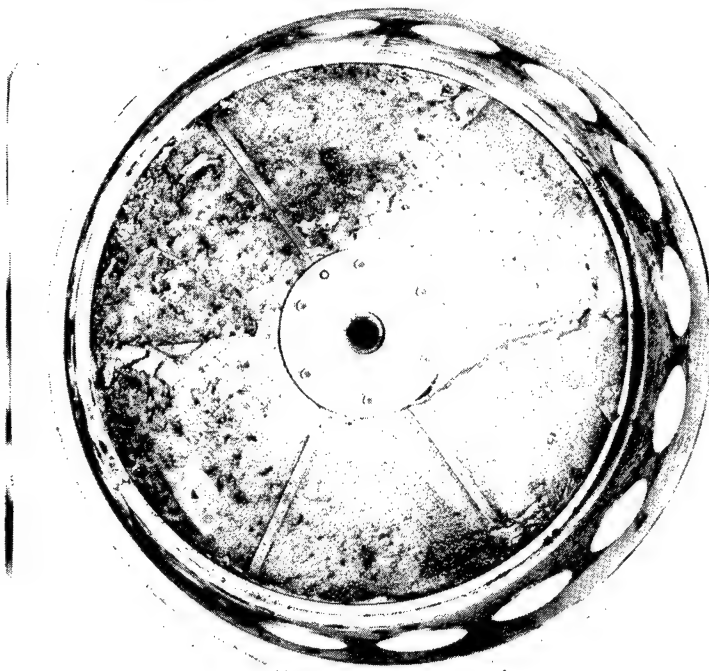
Twin Disc - Back Surface (Front Collector Removed)
